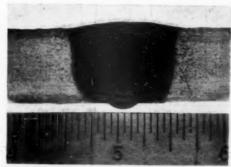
Typical weld in ? in. aluminium alloy plate. This is a single-pass close-butt weld, with no vee preparation, made at 1? in./min. and 690 amp.
